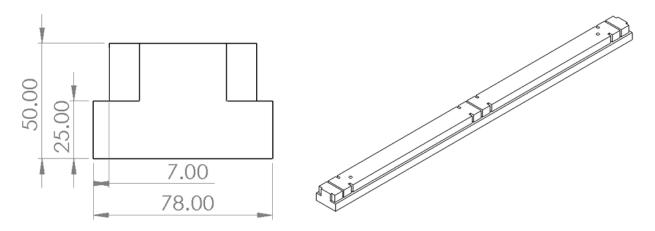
Top and Bottom Plates, left: End Profile, right: Isometric Line Drawing
